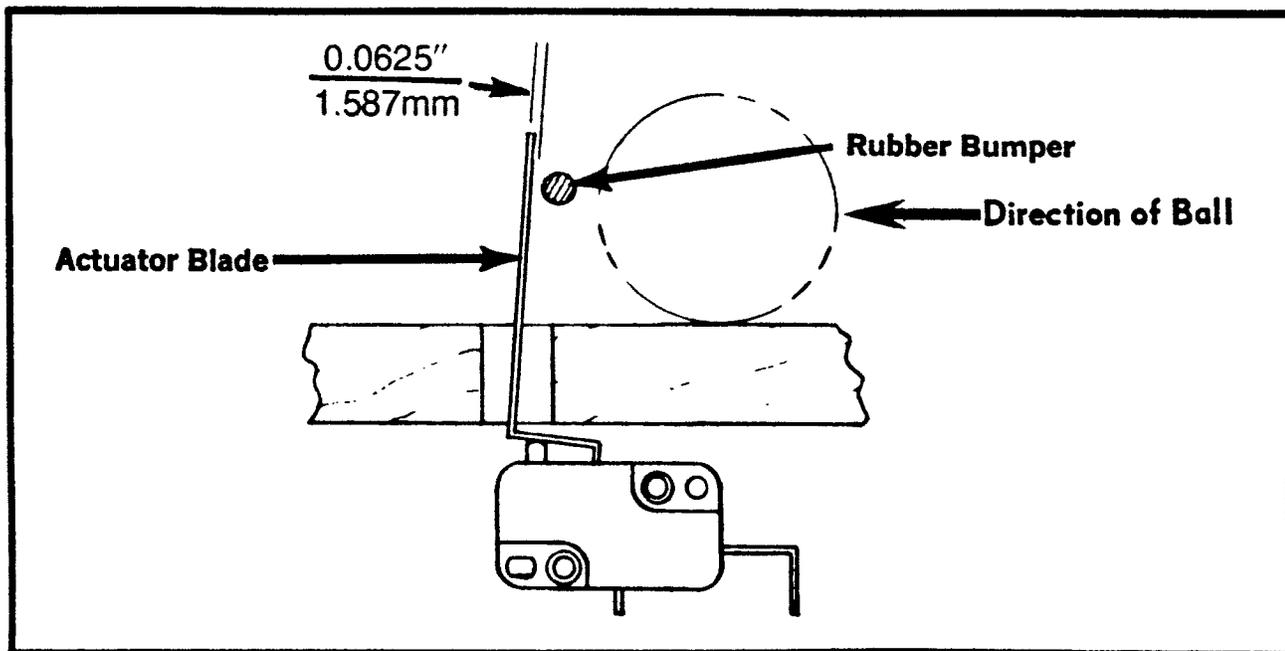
Sling shot and side rubber switch adjustment. Adjust the actuator so that the switch trips within the limits shown.
